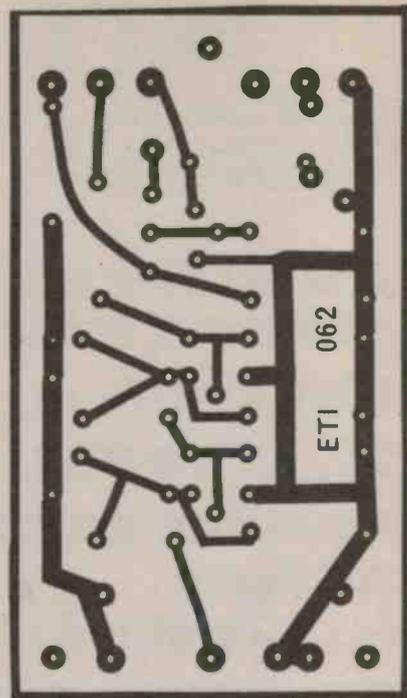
Printed circuit board layout for the tuner. Full size 90mm x 50mm.
